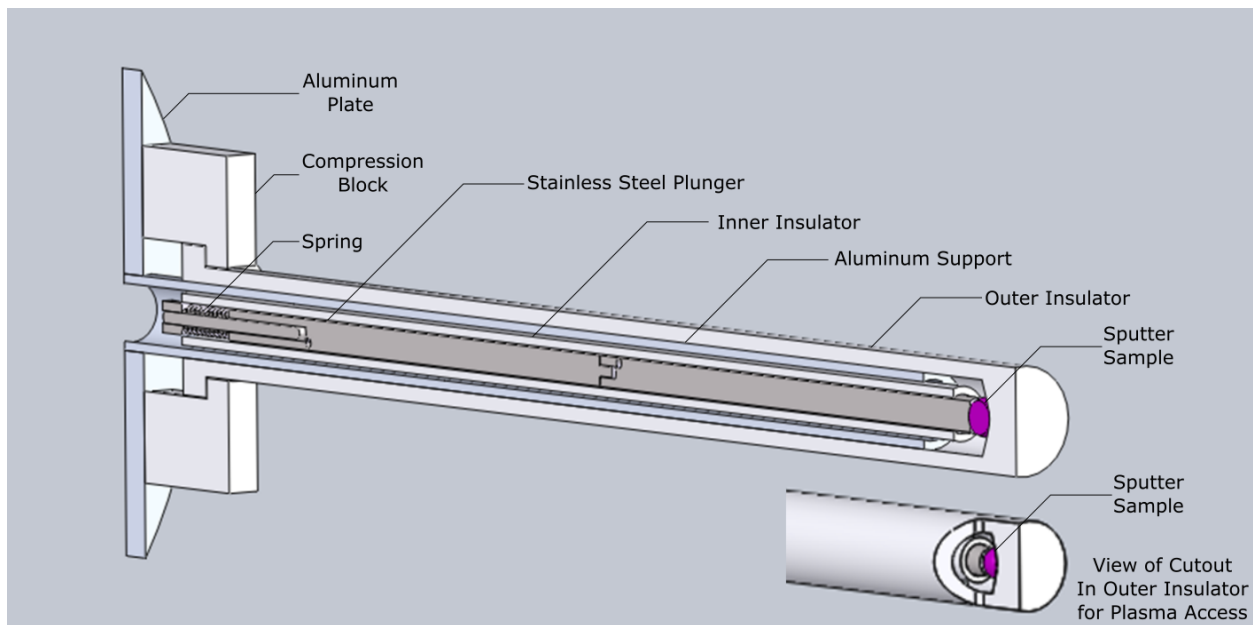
Cross section of radial sputtering probe for SuSI. The sputtering voltage is passed from the spring and plunger assembly through a wire inside the oven port to a vacuum feedthrough. The outer insulator protruded 14.5 cm from the injection baffle and was 11.4 mm in diameter.
